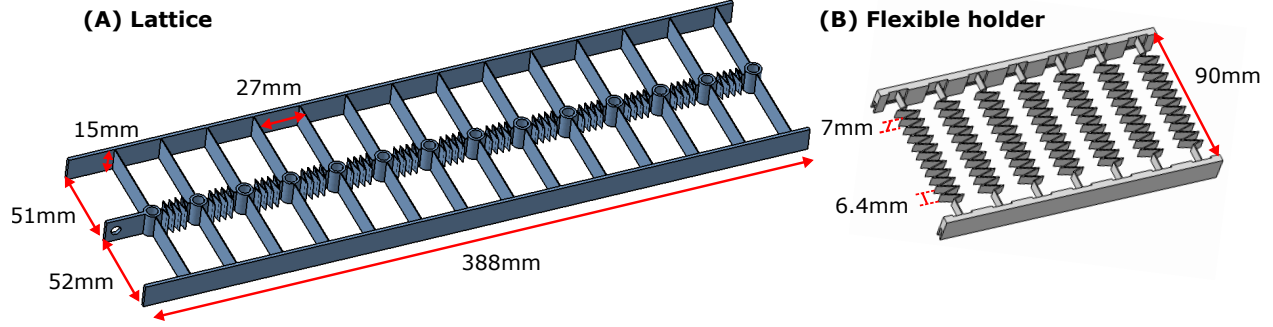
CAD models for (A) the lattice and (B) the flexible holder with key geometric dimensions shown.
